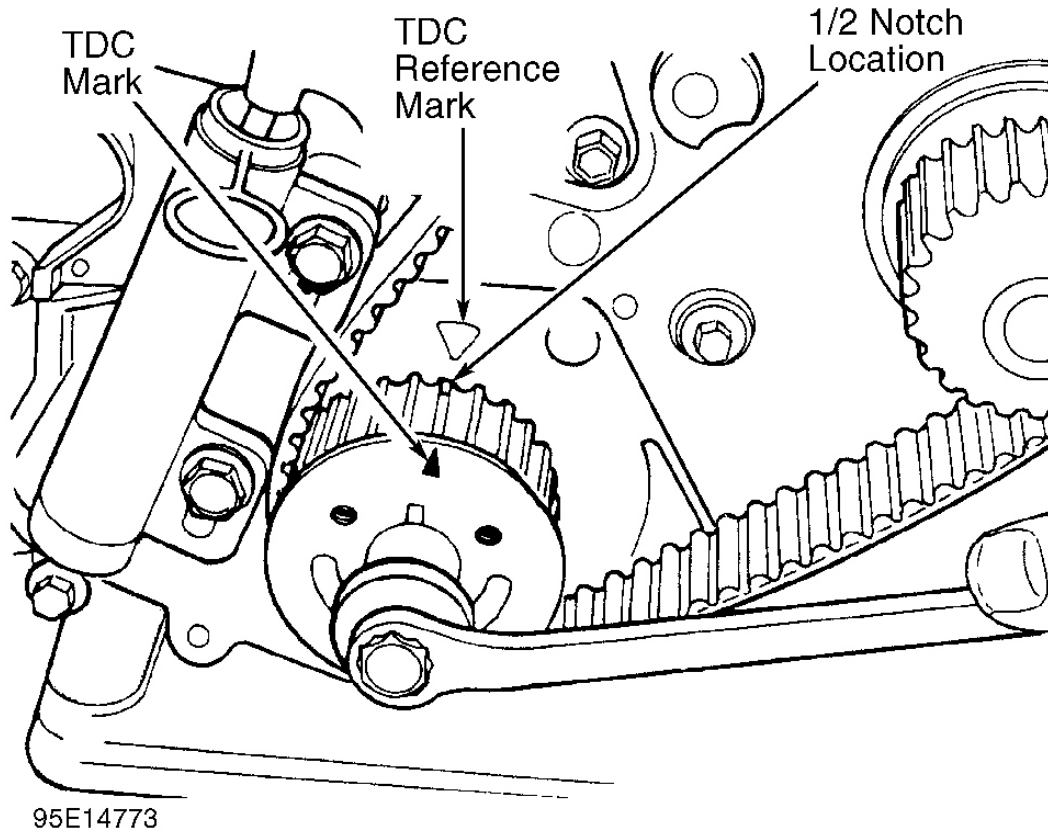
Aligning Crankshaft Sprocket Timing Marks
